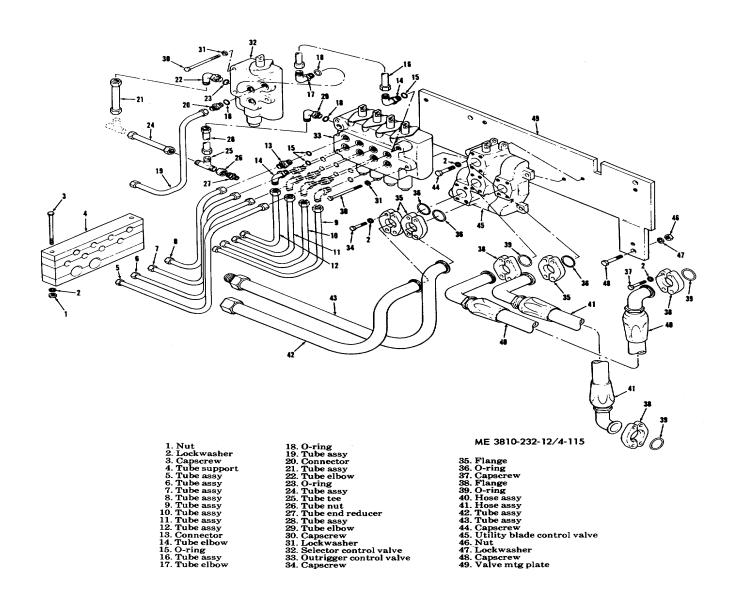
Manifold control valves, and related parts, removal and installation (model 2385).
